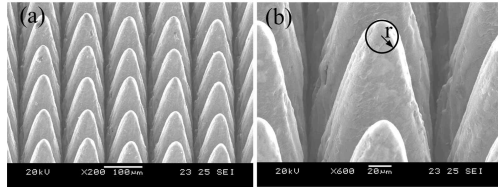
(a) micro pin array machined by laser beam and (b) enlarged view of micro pin
